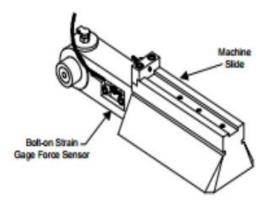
Bolt-on strain gage mounting in recessed machine slide for space savings [6]
